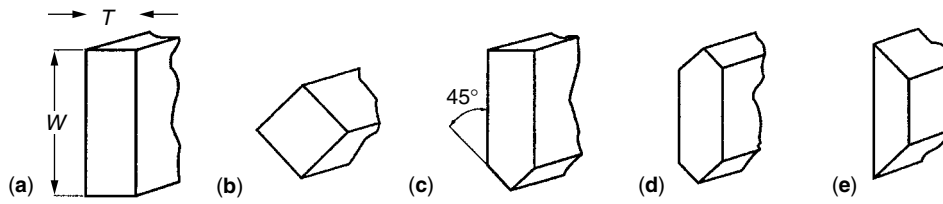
Type of polyurethane squeegee; (a) standard, (b) diamond, (c) wedge end, (d) double-wedge ends, and (e) double knife [22]
